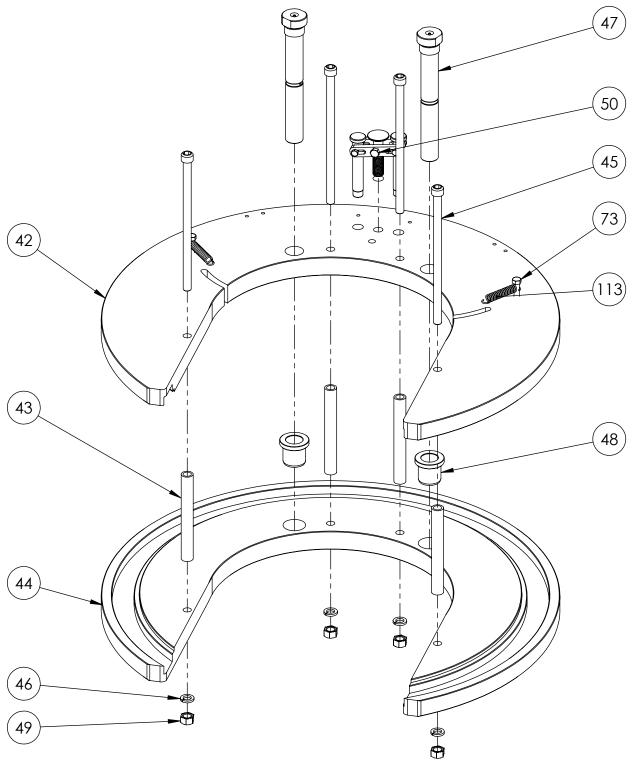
CLE22000XHT-14 External Tong Assembly 04
